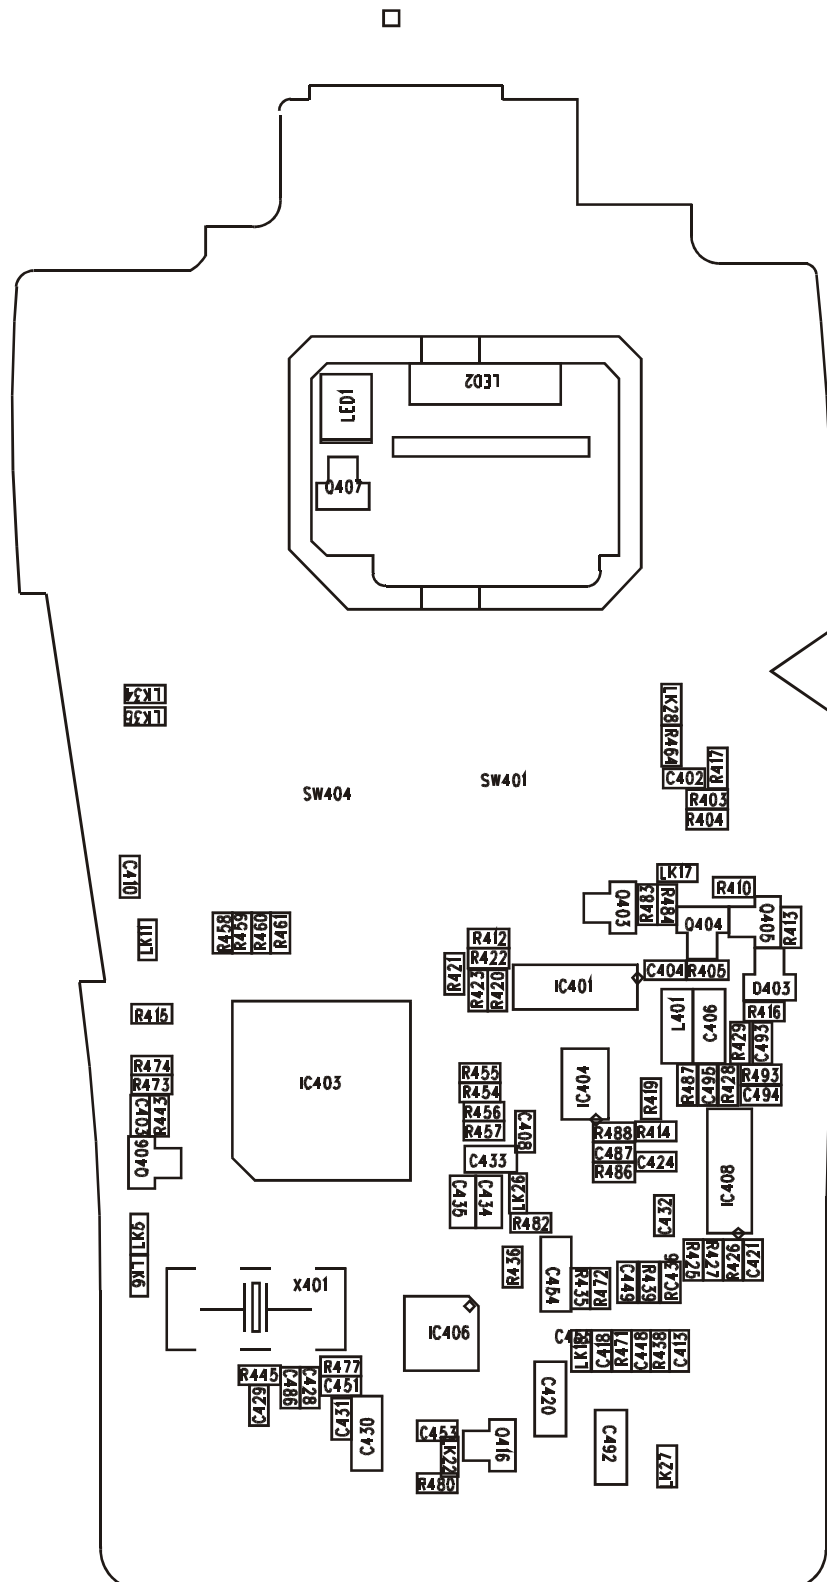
Legend Layout for Top Side of Digital PCB
